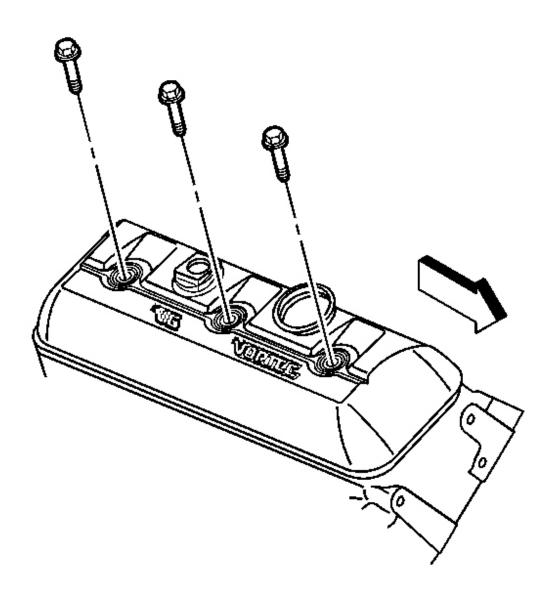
View Of Valve Rocker Arm Cover Bolts (Right) Courtesy of GENERAL MOTORS CORP.
